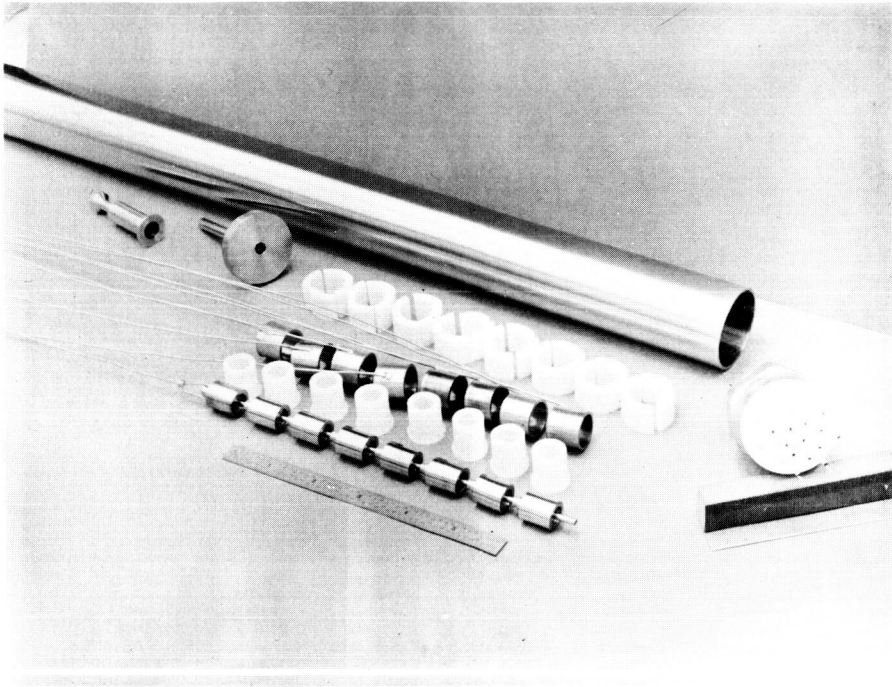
PARTS OF THE ALUMINA IRRADIATION CAPSULE SHOWING THE EIGHT ALUMINA SPECIMENS, ELECTRODES, VACUUM CAN AND SEAL PRIOR TO ASSEMBLY.
